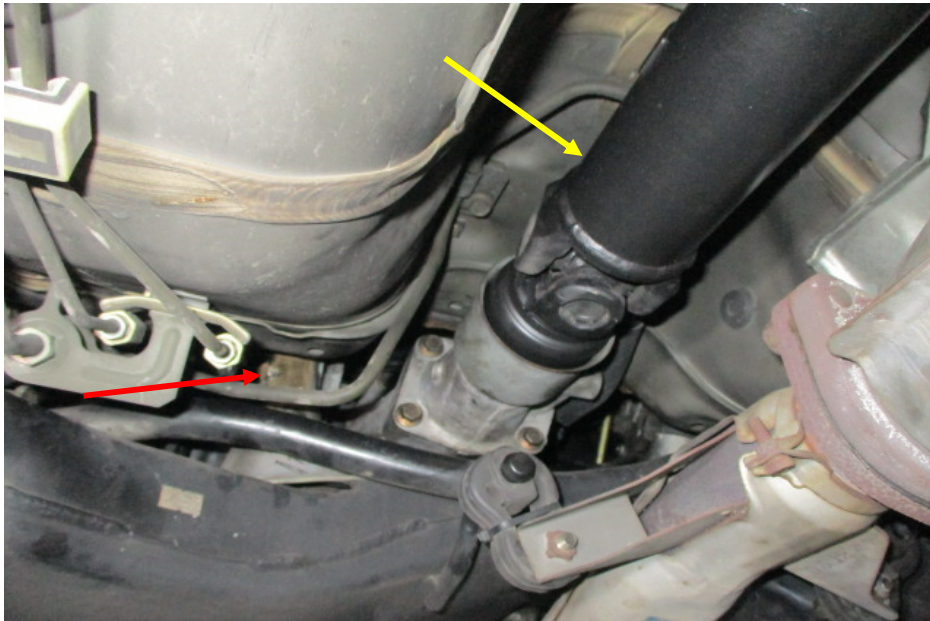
shows the propeller shaft (yellow arrow), which is connected to the transfer case of the Motor Car. This propeller shaft connects to the rear differential of the Motor Car, providing the drive to its rear wheels. The transmission assembly of the Motor Car is supported by 2 brackets. One at the front and one at the rear (red arrow) of the transmission assembly.
